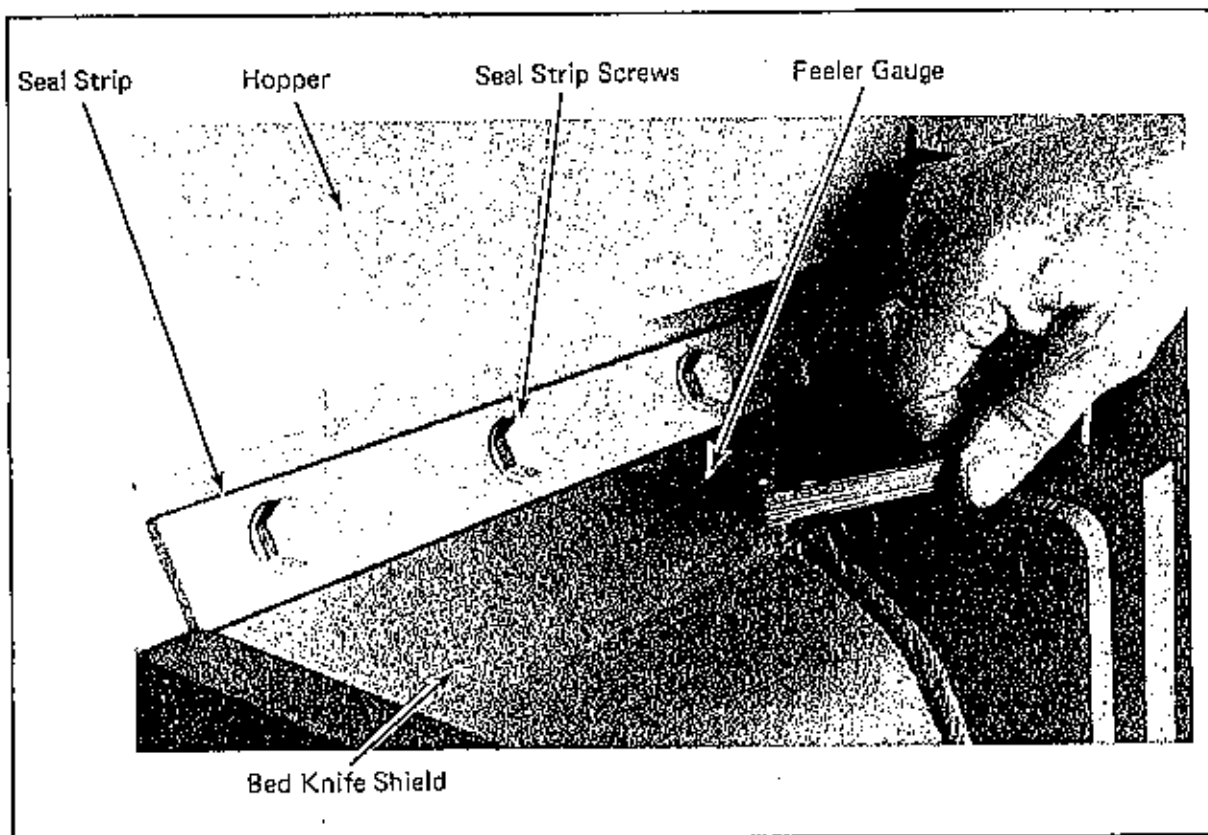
Use of Feeler Gauge For Seal Strip Settings (Typical)
